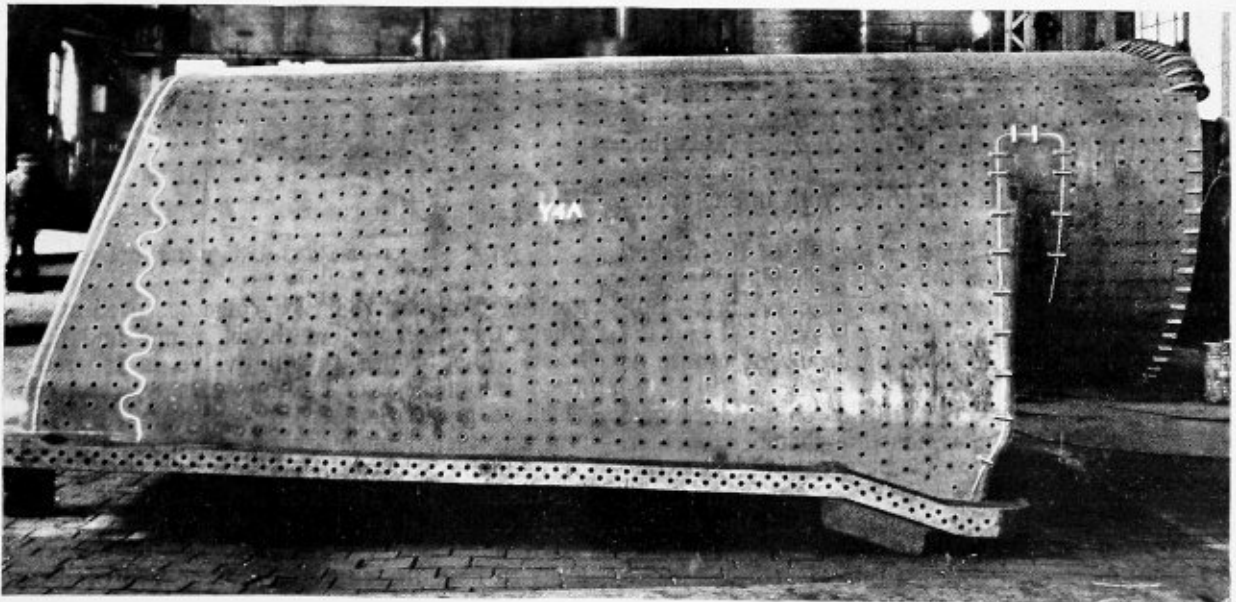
Front view showing flue sheet welded in and reinforcing ribs welded on
